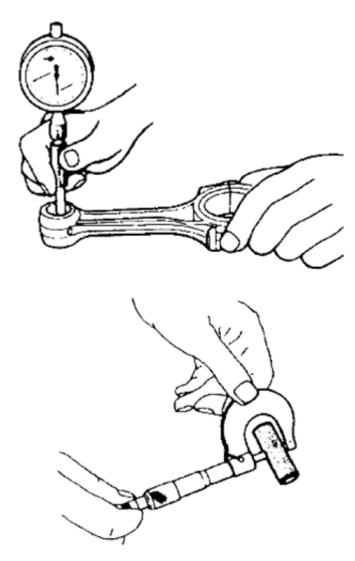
Checking Piston Pin Clearance In Connecting Rod Small-End And Piston Courtesy of SUZUKI OF AMERICA CORP.
